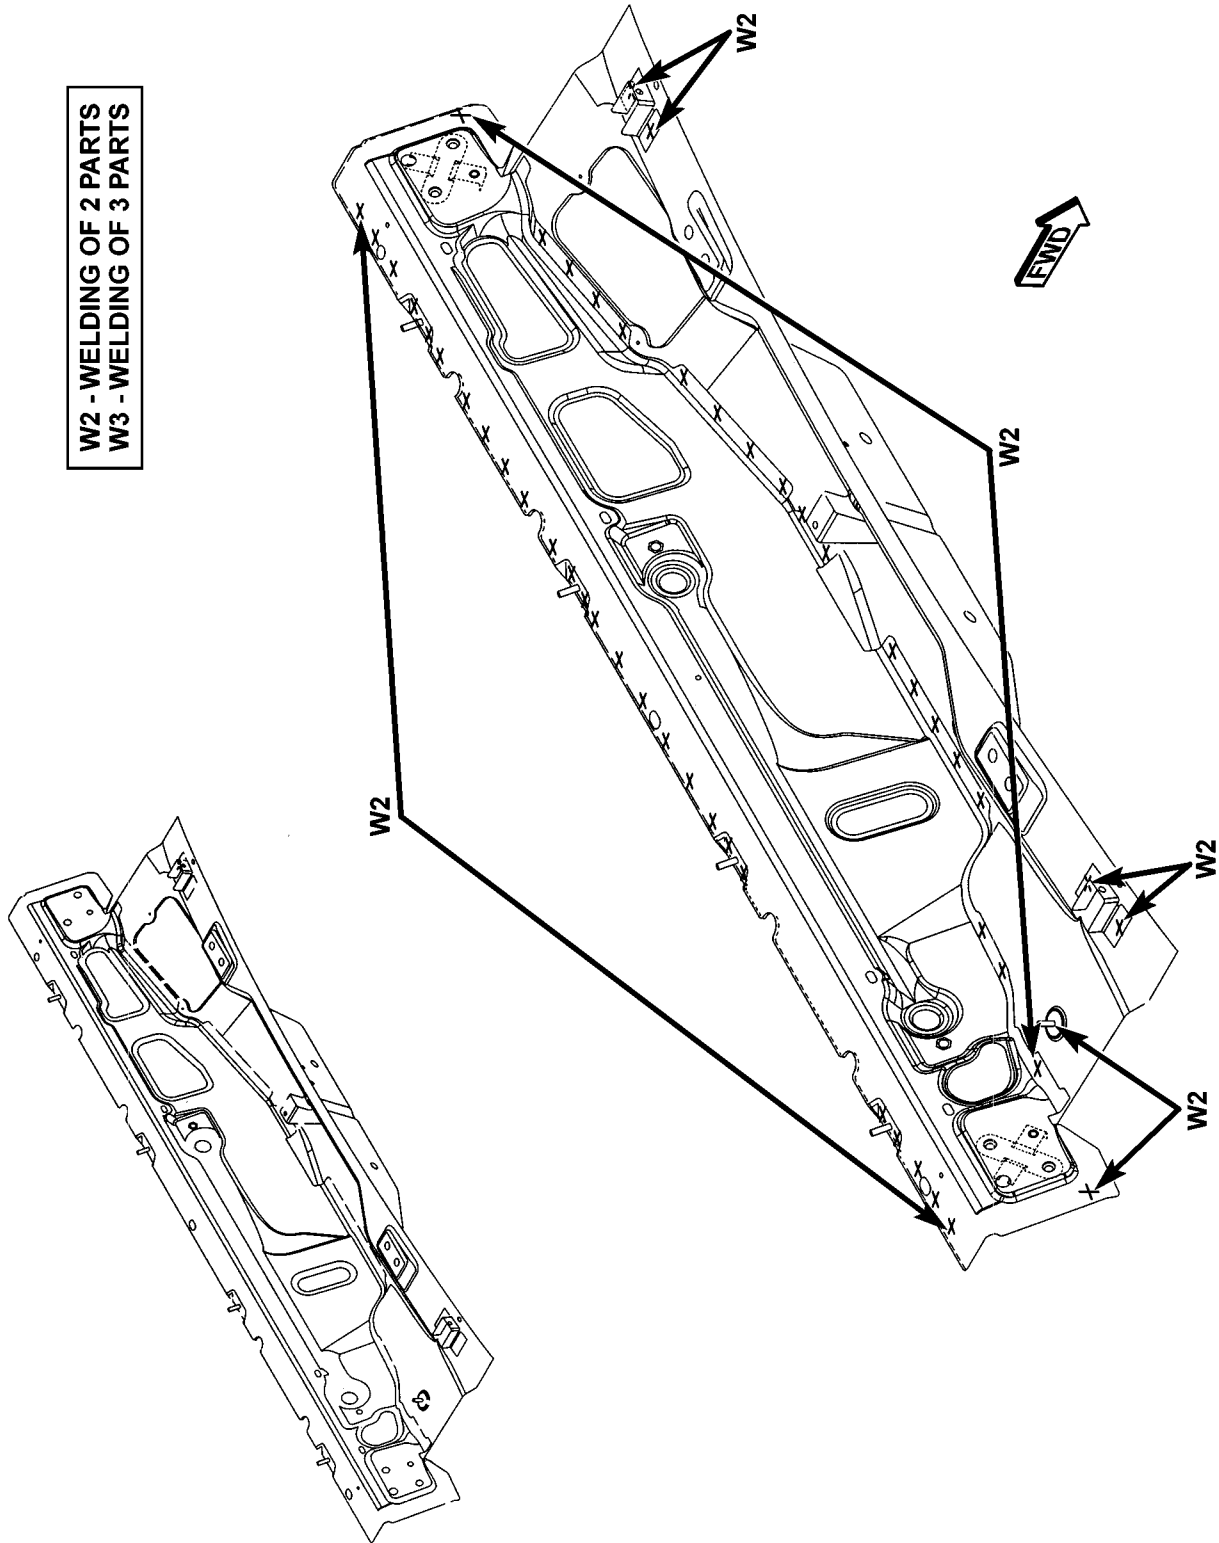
COWL ASSEMBLY - RIGHT HAND DRIVE (1 OF 3)
